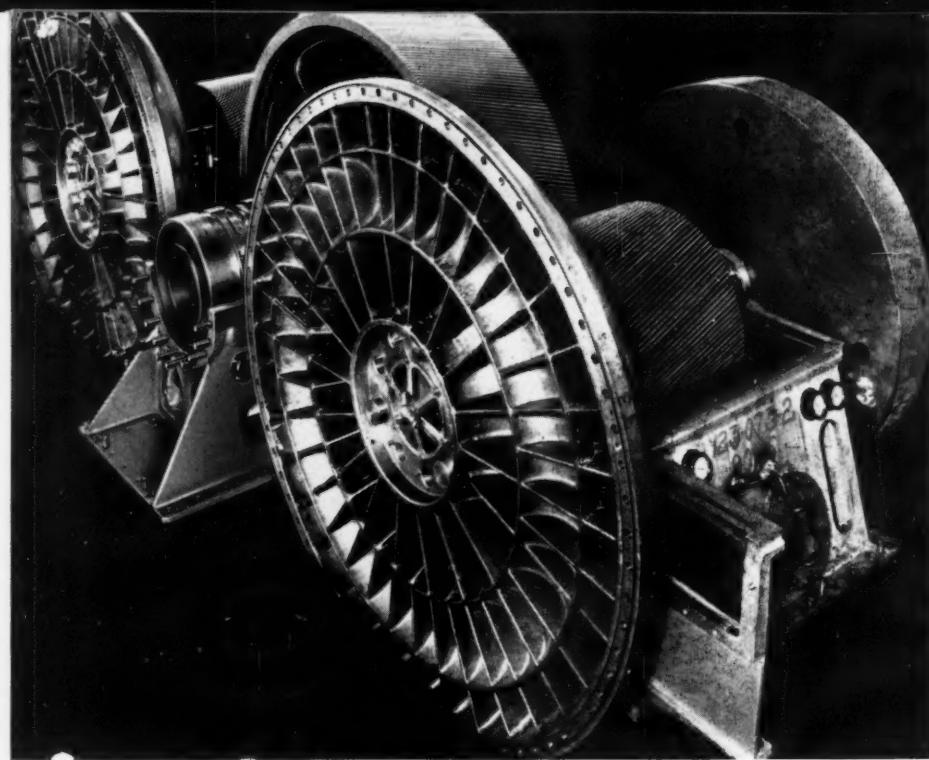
Left—Reduction gear for a C-2 ship transmits power from two 3000 horsepower engines to a single propeller. Hydraulic couplings connect engines with their respective pinions
